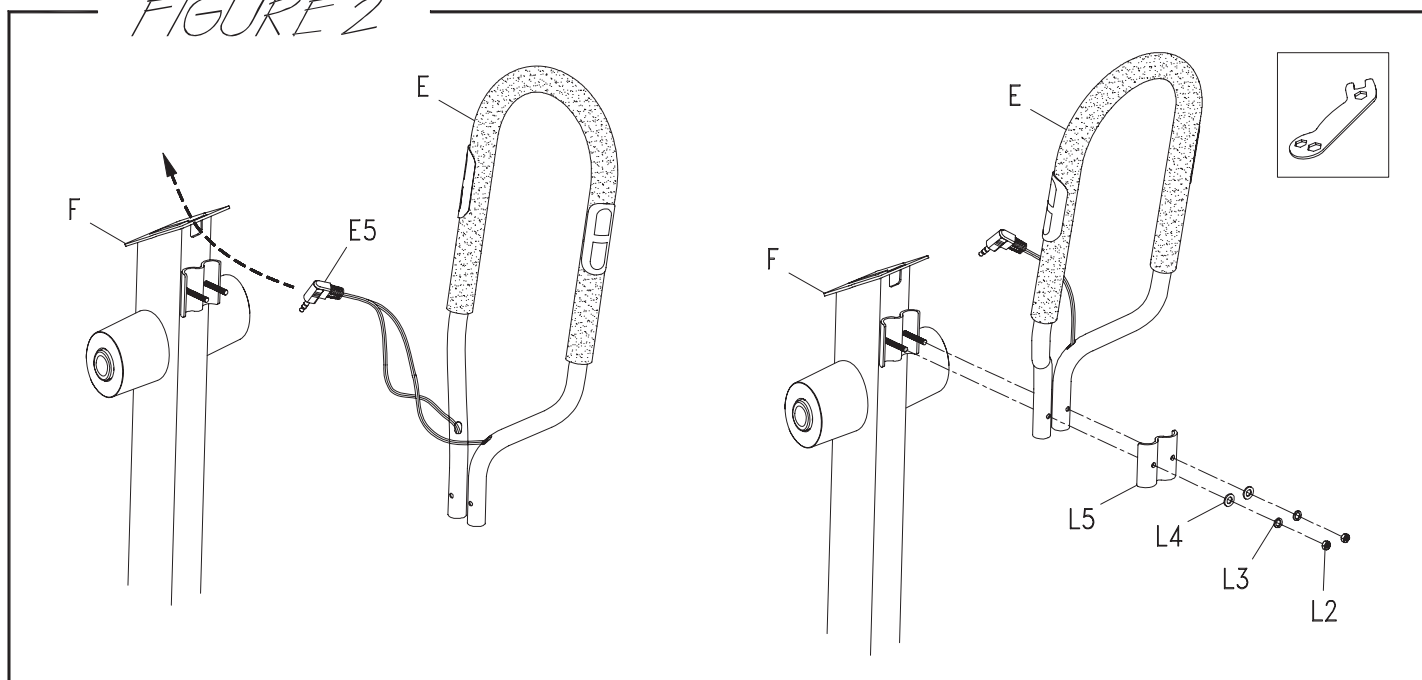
ASSEMBLY FOR SMALL HANDLE BAR
